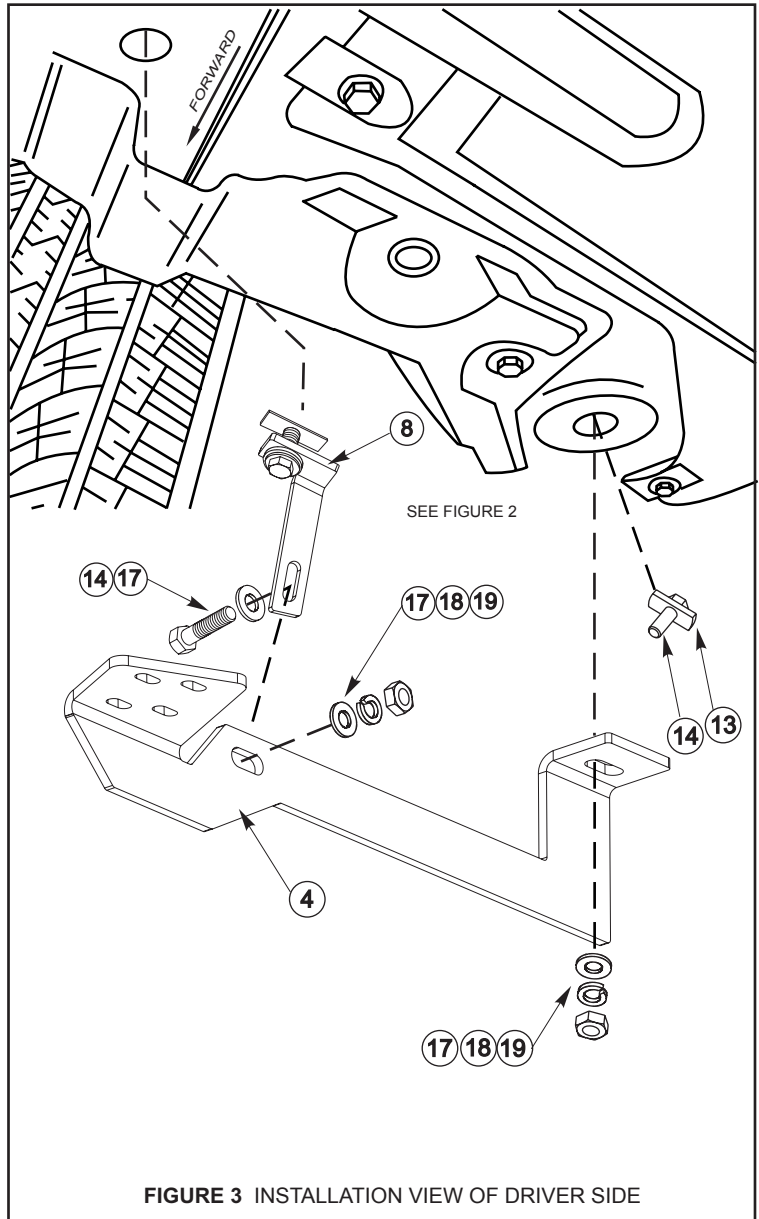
INSTALLATION VIEW OF DRIVER SIDE
